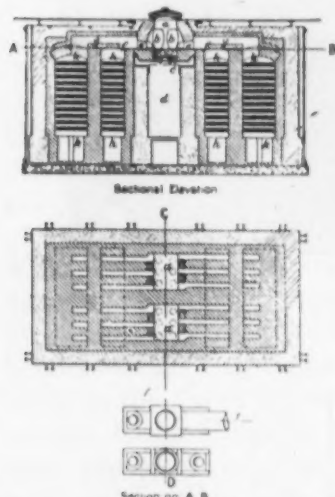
Sectional view of a crucible steel furnace of an American manufacturer.
